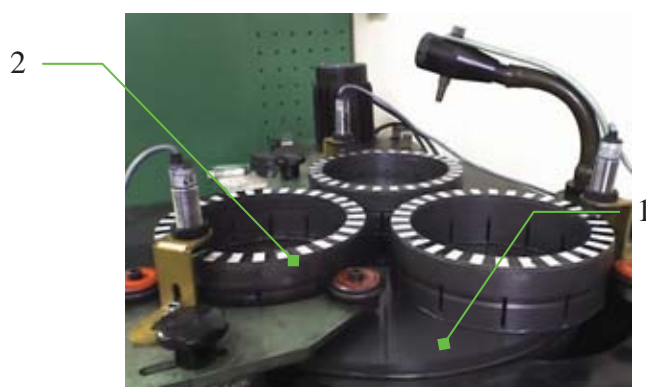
Executory system of single disc lapping machine ABRALAP 380: 1- conditioning rings, 2-lapping tool,
